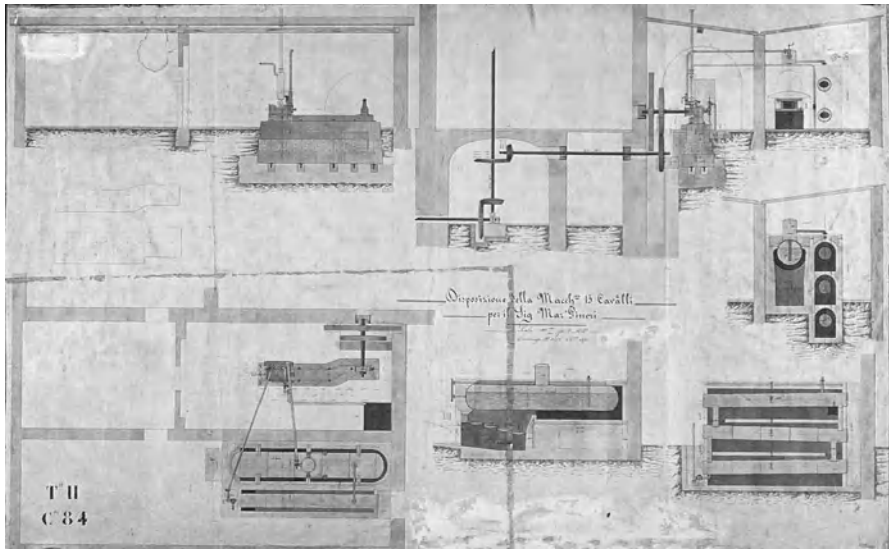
Steam machine for an Italian factory by Ansaldo (1856)
